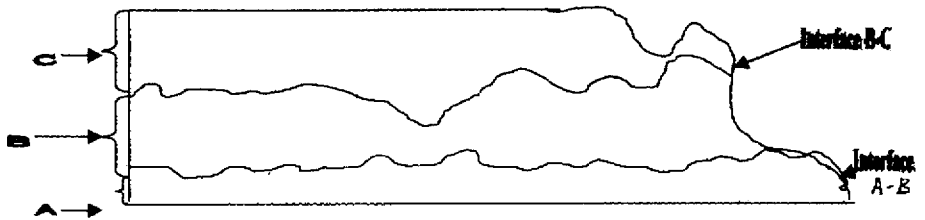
Line drawing of the forge-welded iron bar — longitudinal top view
